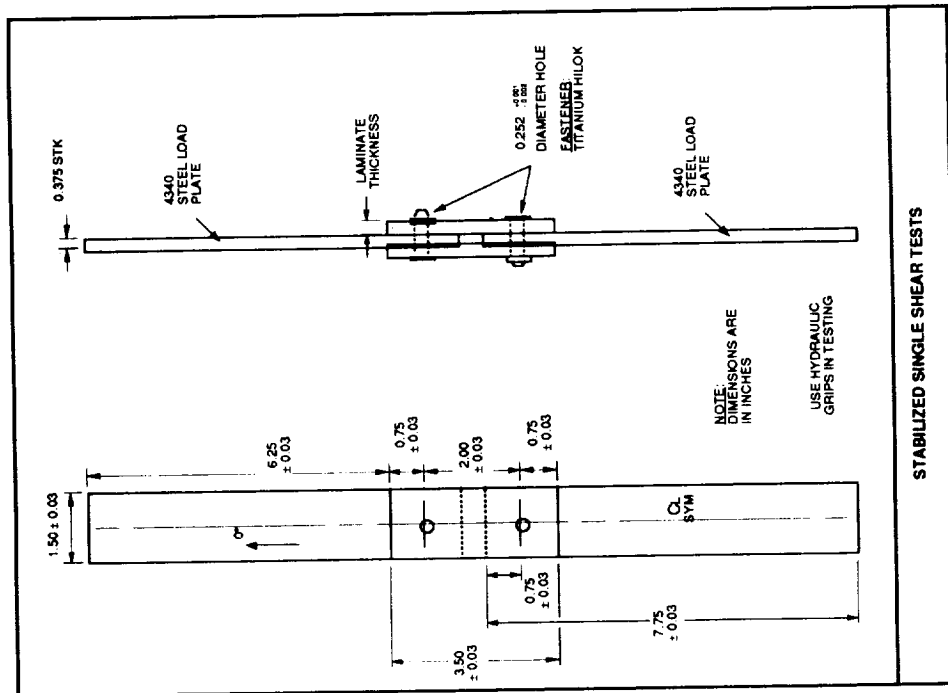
Baseline Dimensions for Stabilized Single-Shear Specimen.
